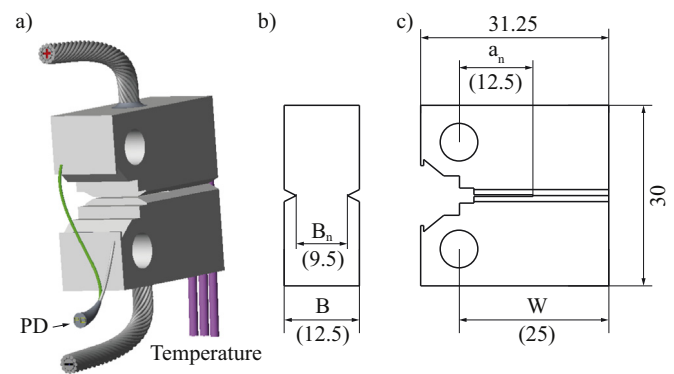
A 3D view and specimen drawing of an instrumented CT specimen with side grooves. All measurements are in mm.
